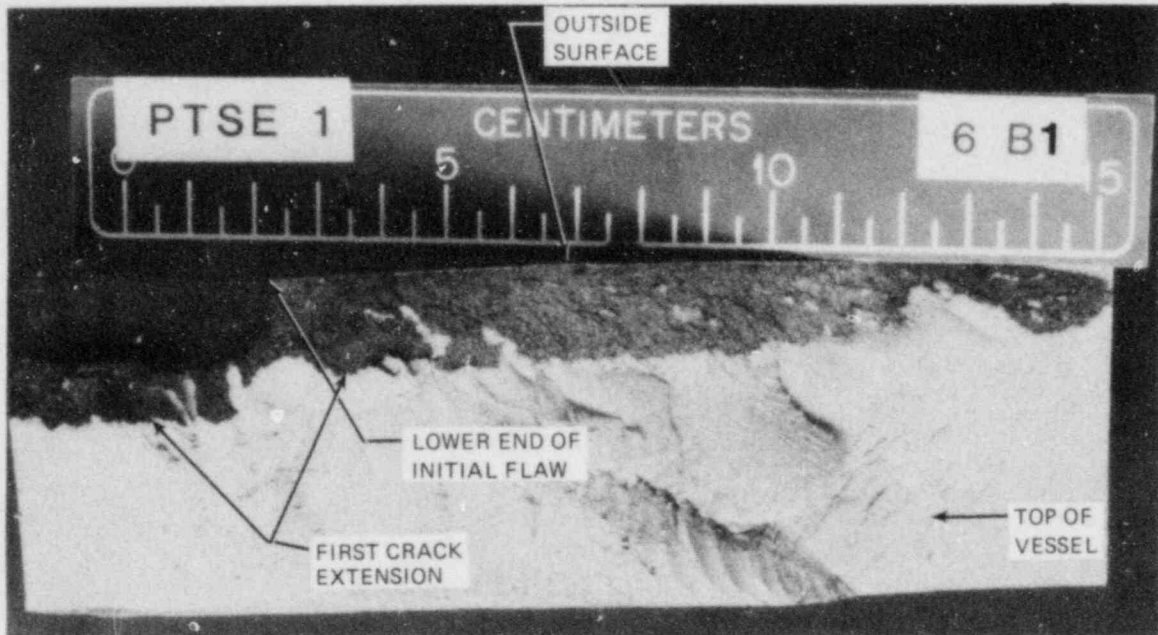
Fracture surface B of main flaw and branch 1 in segment 6 of PTSE-1 flaw. Crack extensions in the piece occurred only during first crack jump, which was in PTSE-1B transient. (See Fig. 10.3 for key to location.)
